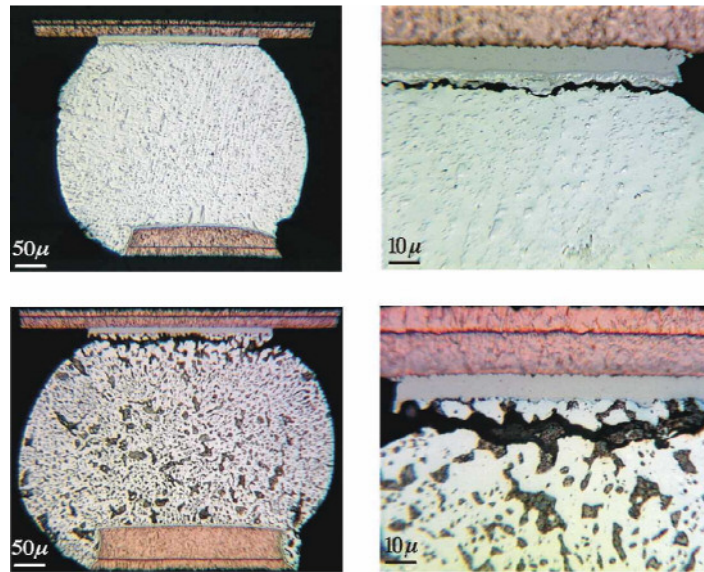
Thermal fatigue failure of SAC (upper images) and tin/lead (lower images) BGAs
